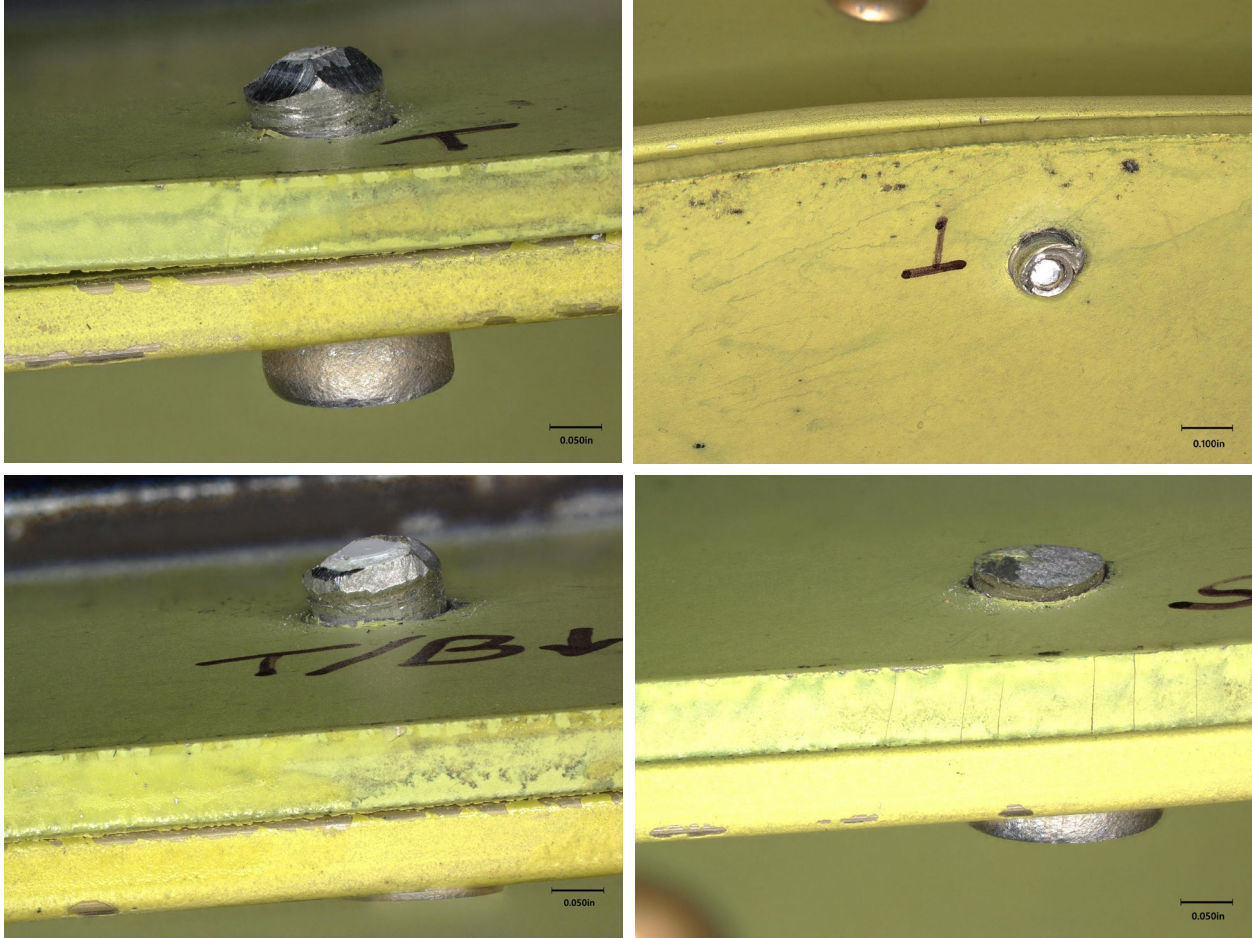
Digital microscope images showing typical fractured fastener characteristics for solid rivet tensile fracture mode (upper left), solid rivet tensile/bending fracture mode (lower left), blind rivet tensile fracture mode (upper right), and solid rivet shear fracture mode (lower right).
